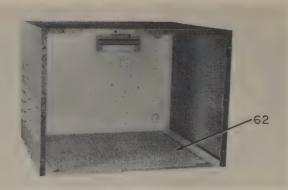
Pulse Generator Assembly SG-30/UP (Sheet 3 of 3)
